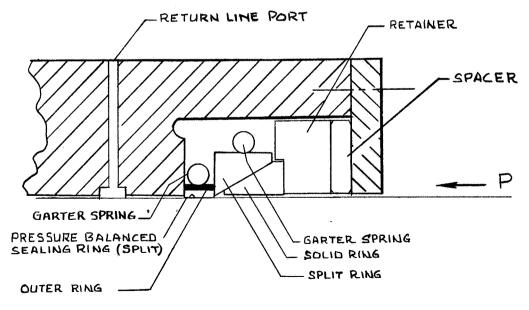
Pressure Balanced Sealing Ring with Axial Loading Rings
